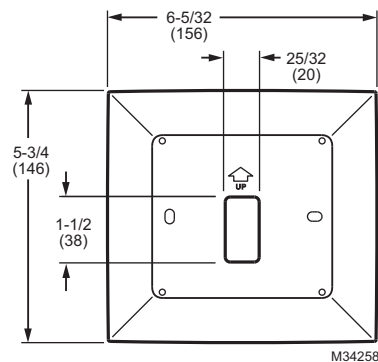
Dimensions of VisionPRO cover plate in in. (mm).
